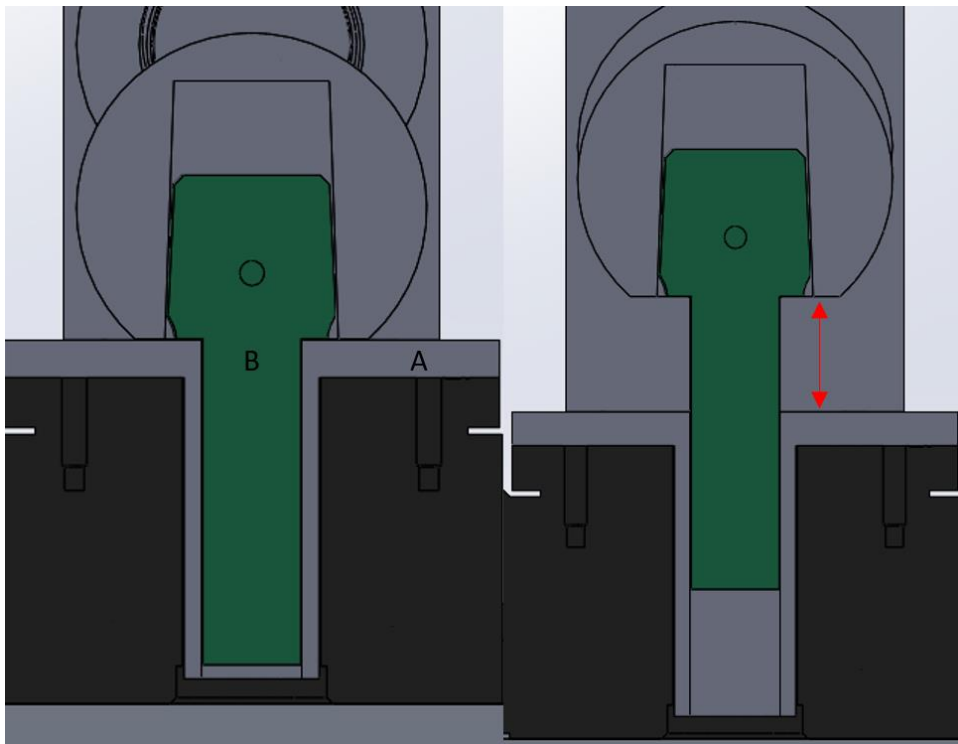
Working principle of the z-screw taper. A: Cylinder base, B: Threaded taper. Left: The femoral head is too low down compared to the elevation rotary axis. Right: The femoral head is raised by rotating the threaded taper.
